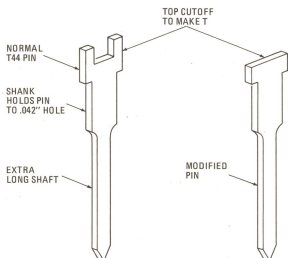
MODIFIED T-44 PIN has notch section cut off forming a "T" pin substitute for the type T-46.
